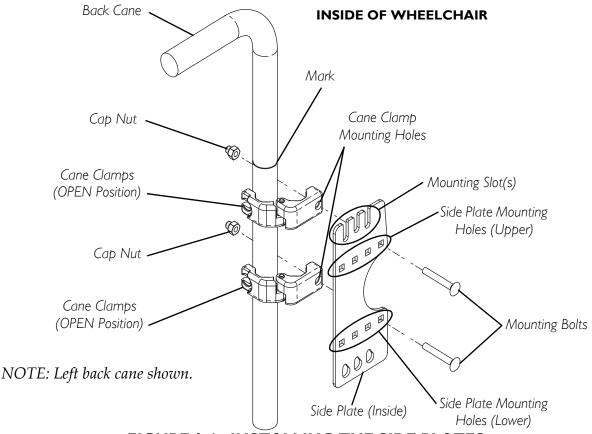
INSTALLING THE SIDE PLATES
